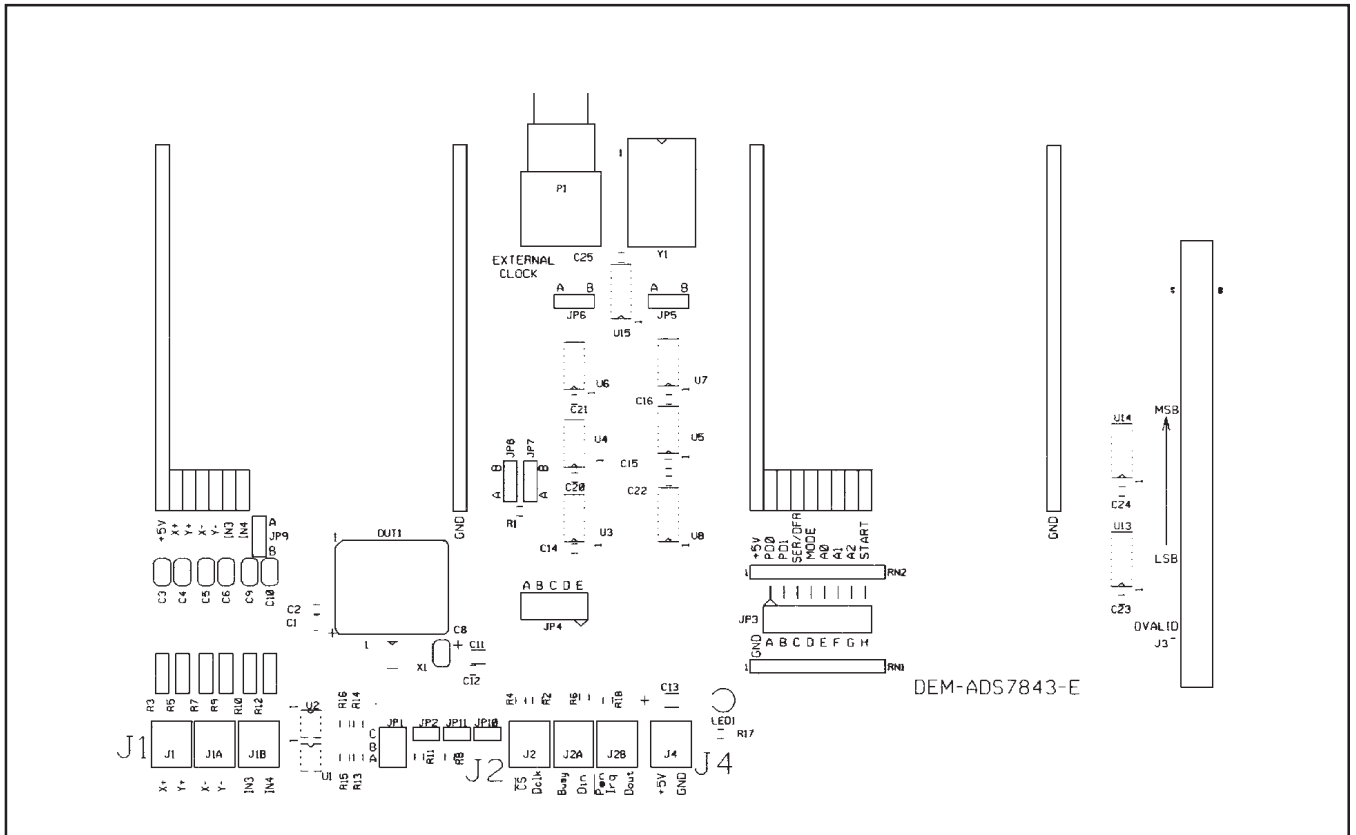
Component Side Silkscreen of the DEM-ADS7843E/45E Demonstration Board.
